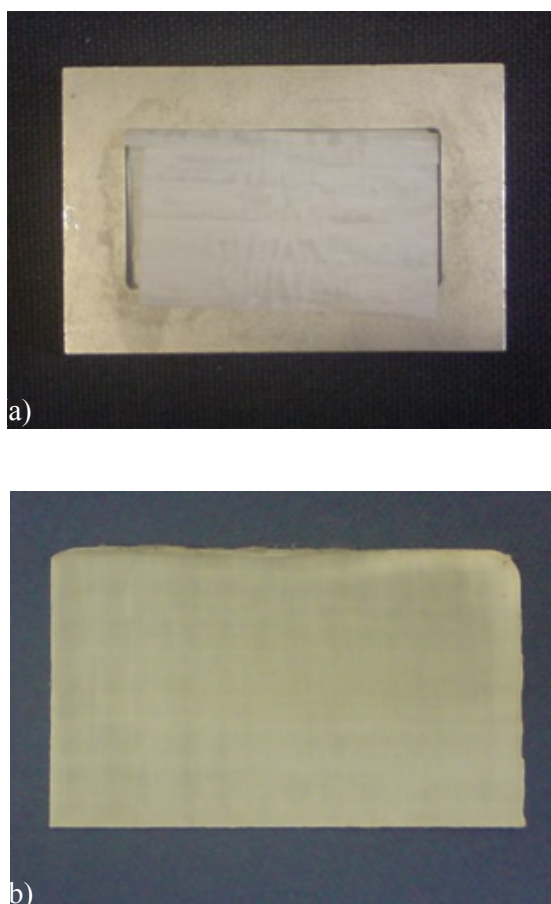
(a) Mould used to hot press the prepreg, and (b) a seven layer PLA-HA-PLA fibre composite membrane produced using the prepreg.
